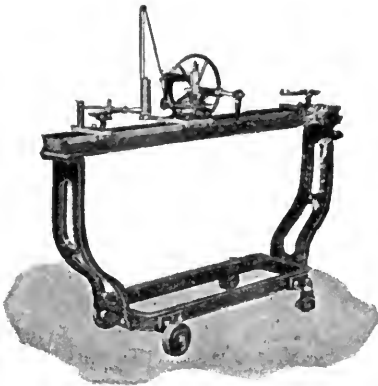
Portable Hand Power Railway Sewing Machine. (Curtis & Marble Co.)
